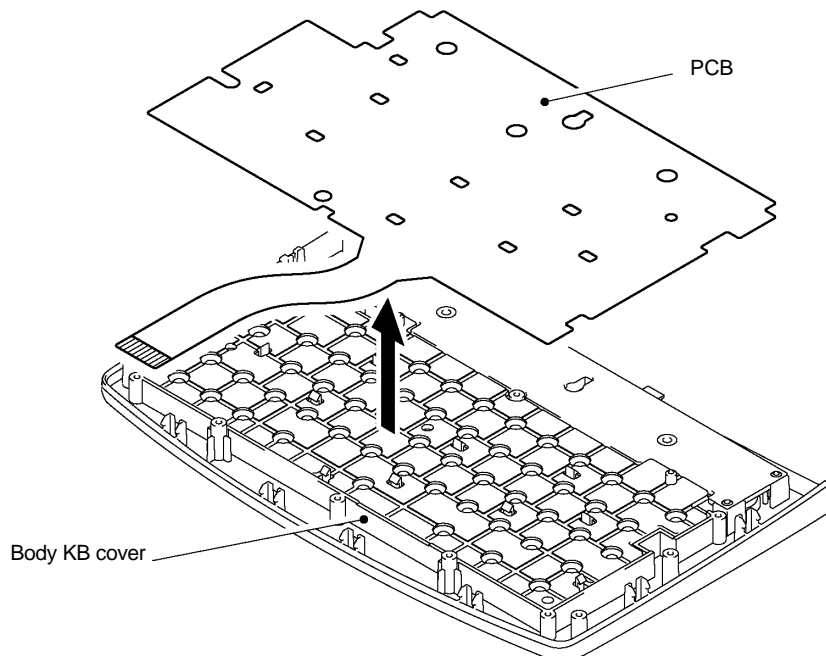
Disassembling the KB Unit/Rubber Key Unit (5)
